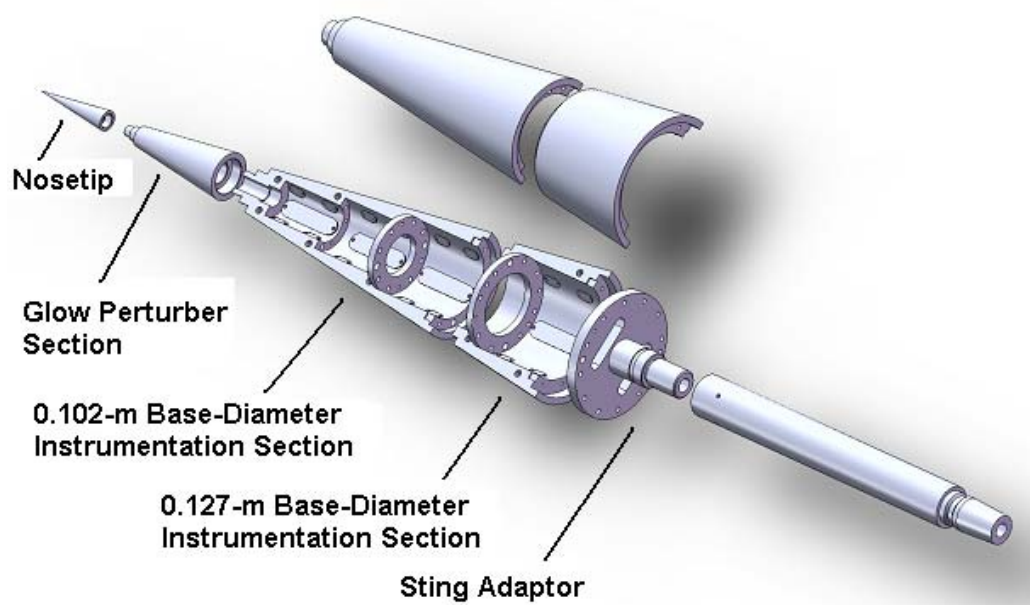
Exploded view of Pressure-Fluctuation Cone
